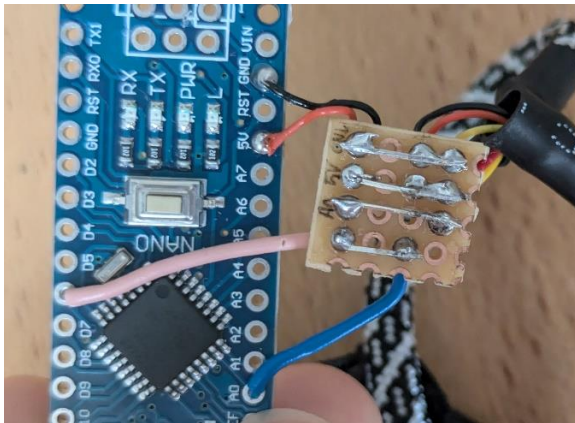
Final wiring consisting of a piece of PCB breadboard with traces forming four intraconnected rows.
